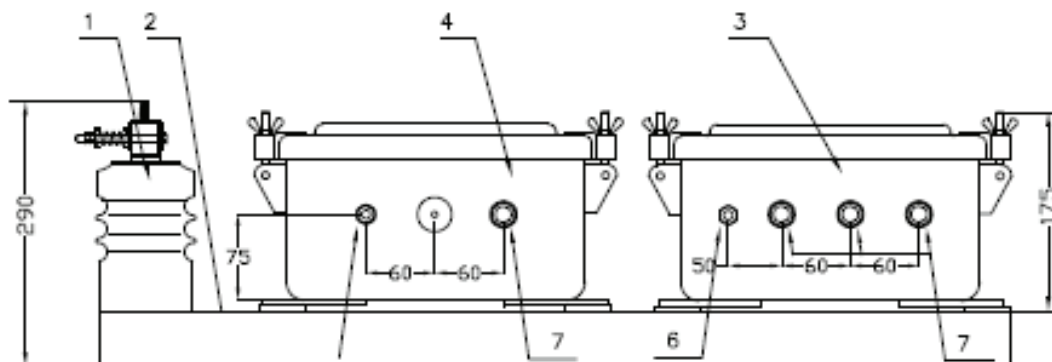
Assembly Drawing for Coupling Filter, Grounding Switch and HF Hybrid Transformer
